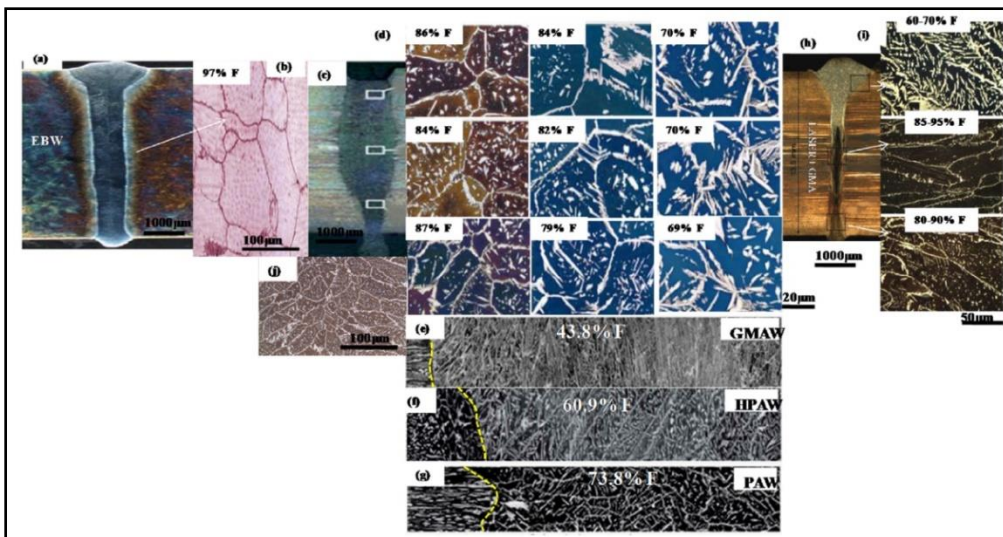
Weld microstructure obtained from different welding processes: (a) Weld bead EBW (b) Microstructure EBW (c) Hybrid weld bead (d) Microstructure with different cooling rate and ferrite content (e) GMAW weld (f) Hybrid PAW weld (g) PAW weld (h) Hybrid (laser + GMA) weld bead (i) Weld microstructure at different sections (j) Hybrid (laser+MIG) weld [Verma et al., 2017]
